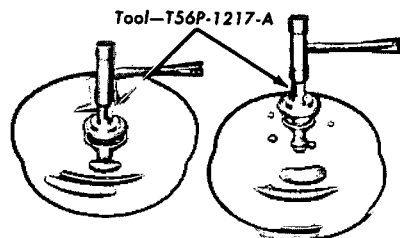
Installing Front Wheel Bearing Cups—Drum
